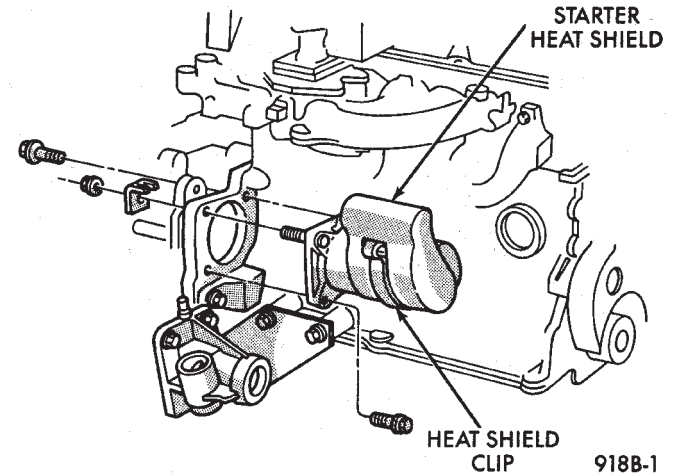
Starter Heat Shield—4 Cylinder Engines
